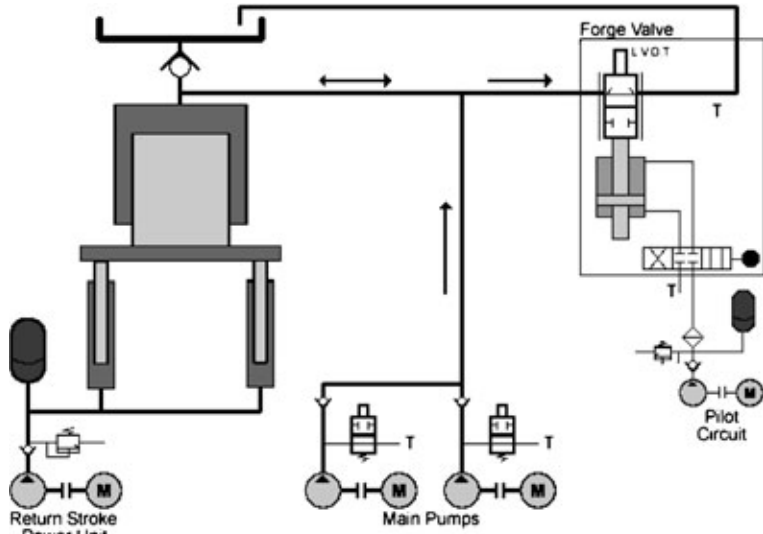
Forging press hydraulic circuit schematic (Courtesy of The Oilgear Company)
